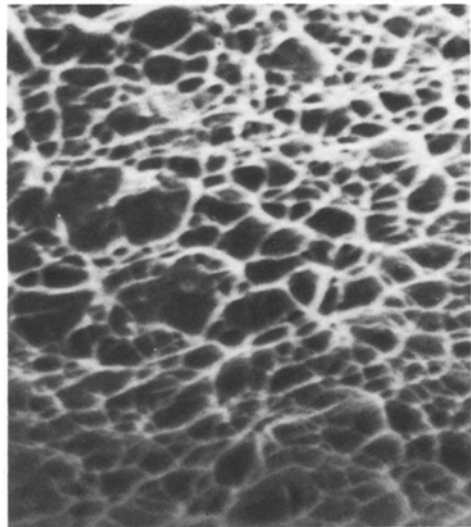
Fracture surface – equiaxed dimples (SEM) (750 X).
